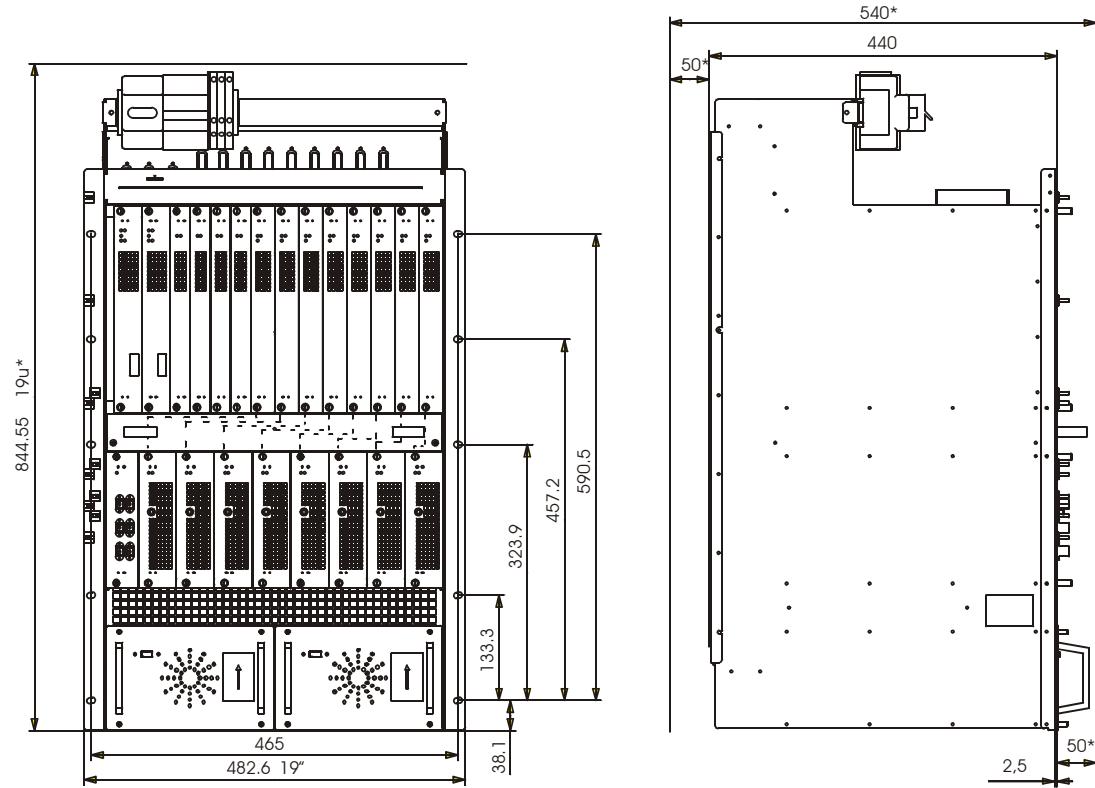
Chassis dimensions and clearances (dimensions in mm)
